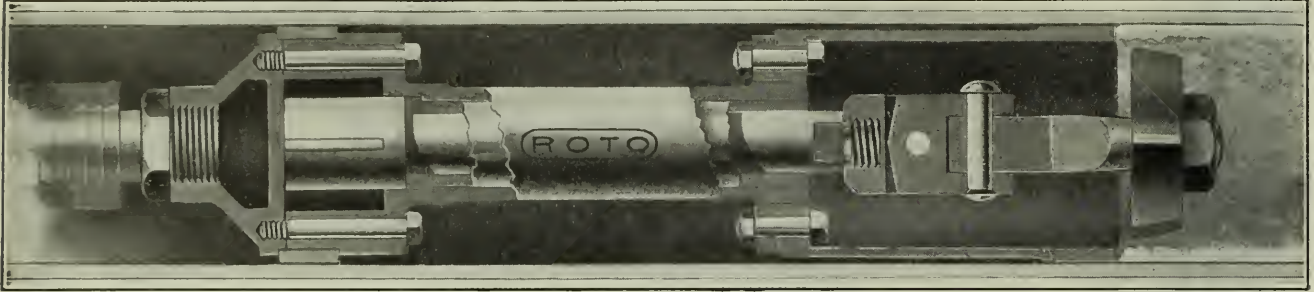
SHOWING GENERAL CONSTRUCTION OF "ROTO" TUBE CLEANER
